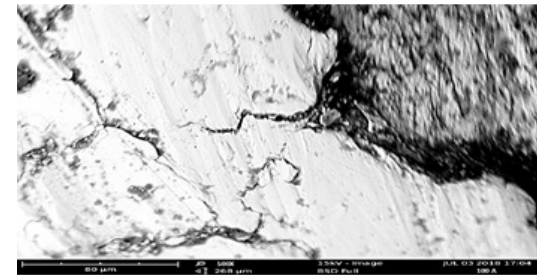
Fracture surface of the test specimen of low heat input at 500X
